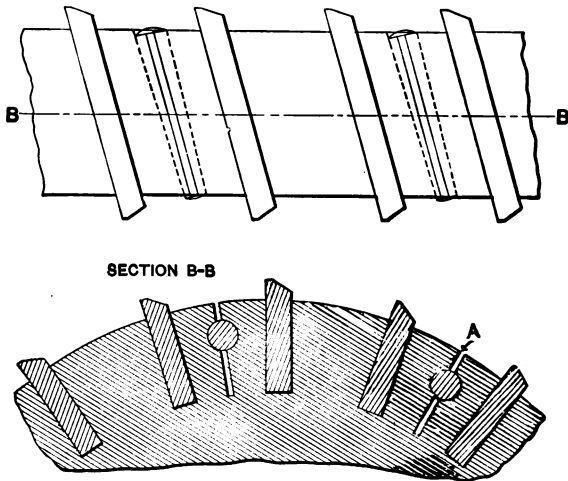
Method of Securing Blades in Body of Axial Cutter
